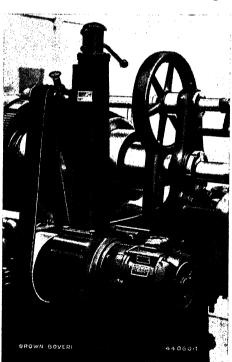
Stepped motor gear with control column, built on to a lathe.
